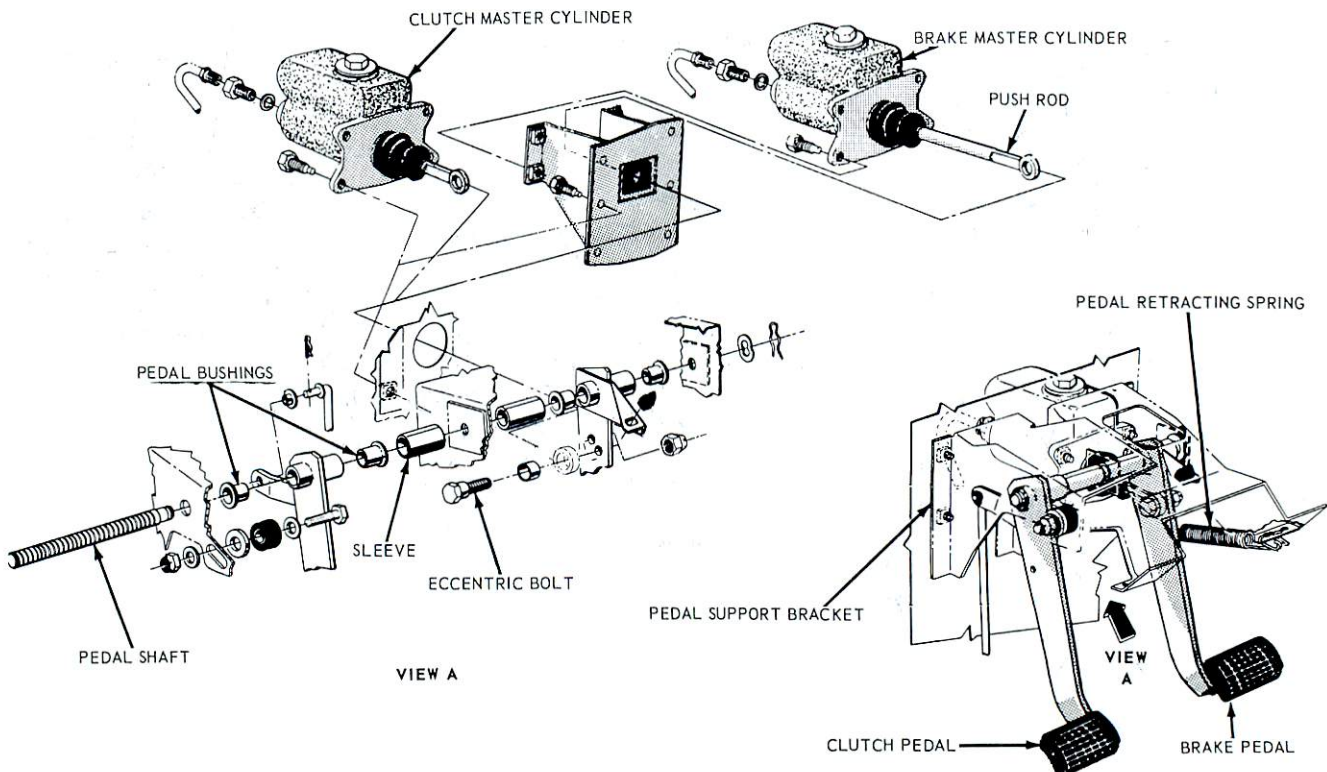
F-, N-, or T-Series Brake Pedal and Related Parts
